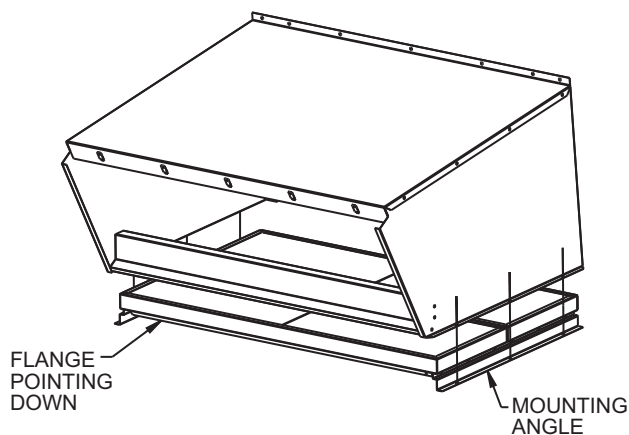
Bottom Filters Installed with Flange Pointing Down
